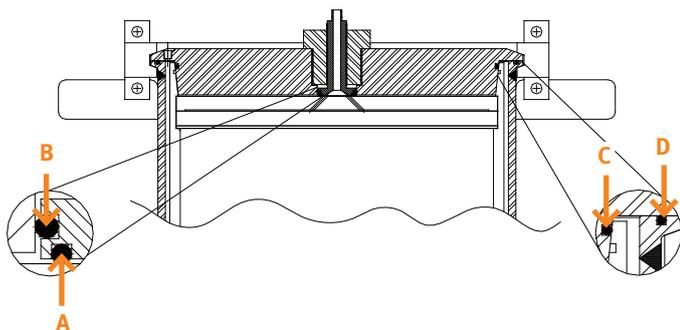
The cartridge seal O-rings (A and B), the barrel O-ring (C), and the head O-ring (D).
